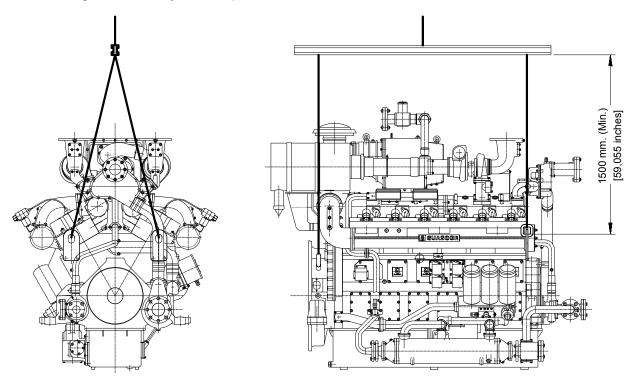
360/480 and SFGLD/SFGM560 Engines Lifting
